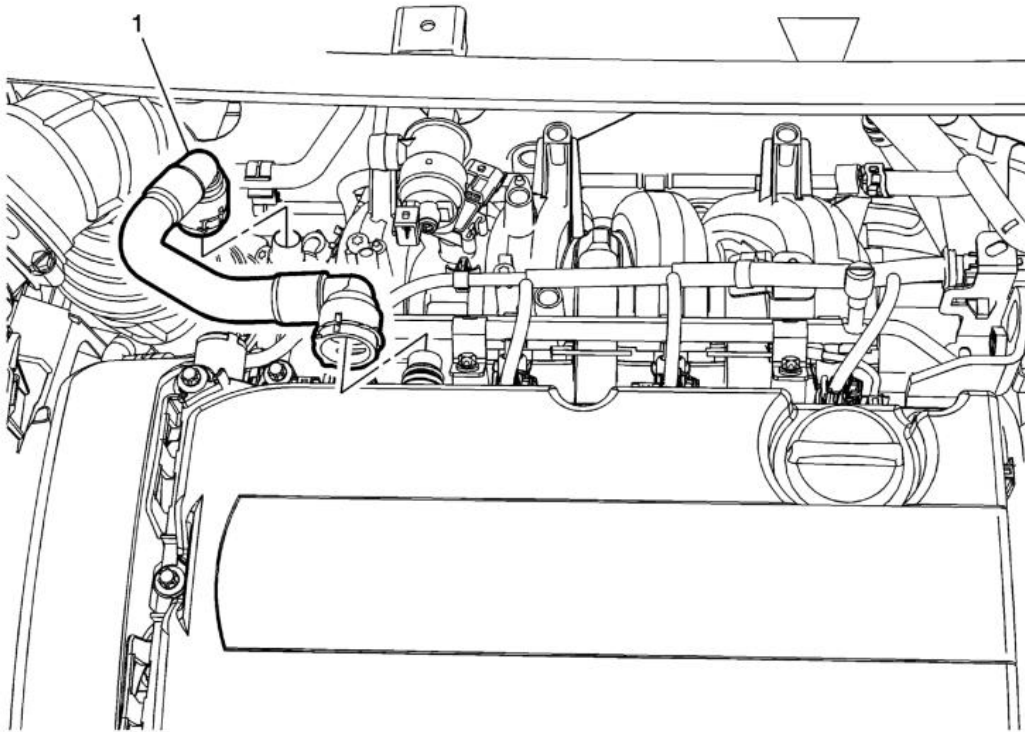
Positive Crankcase Ventilation Hose/Pipe/Tube
